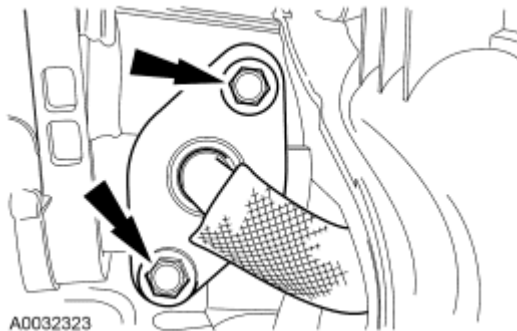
Locating Intake Manifold Assembly Bolts
